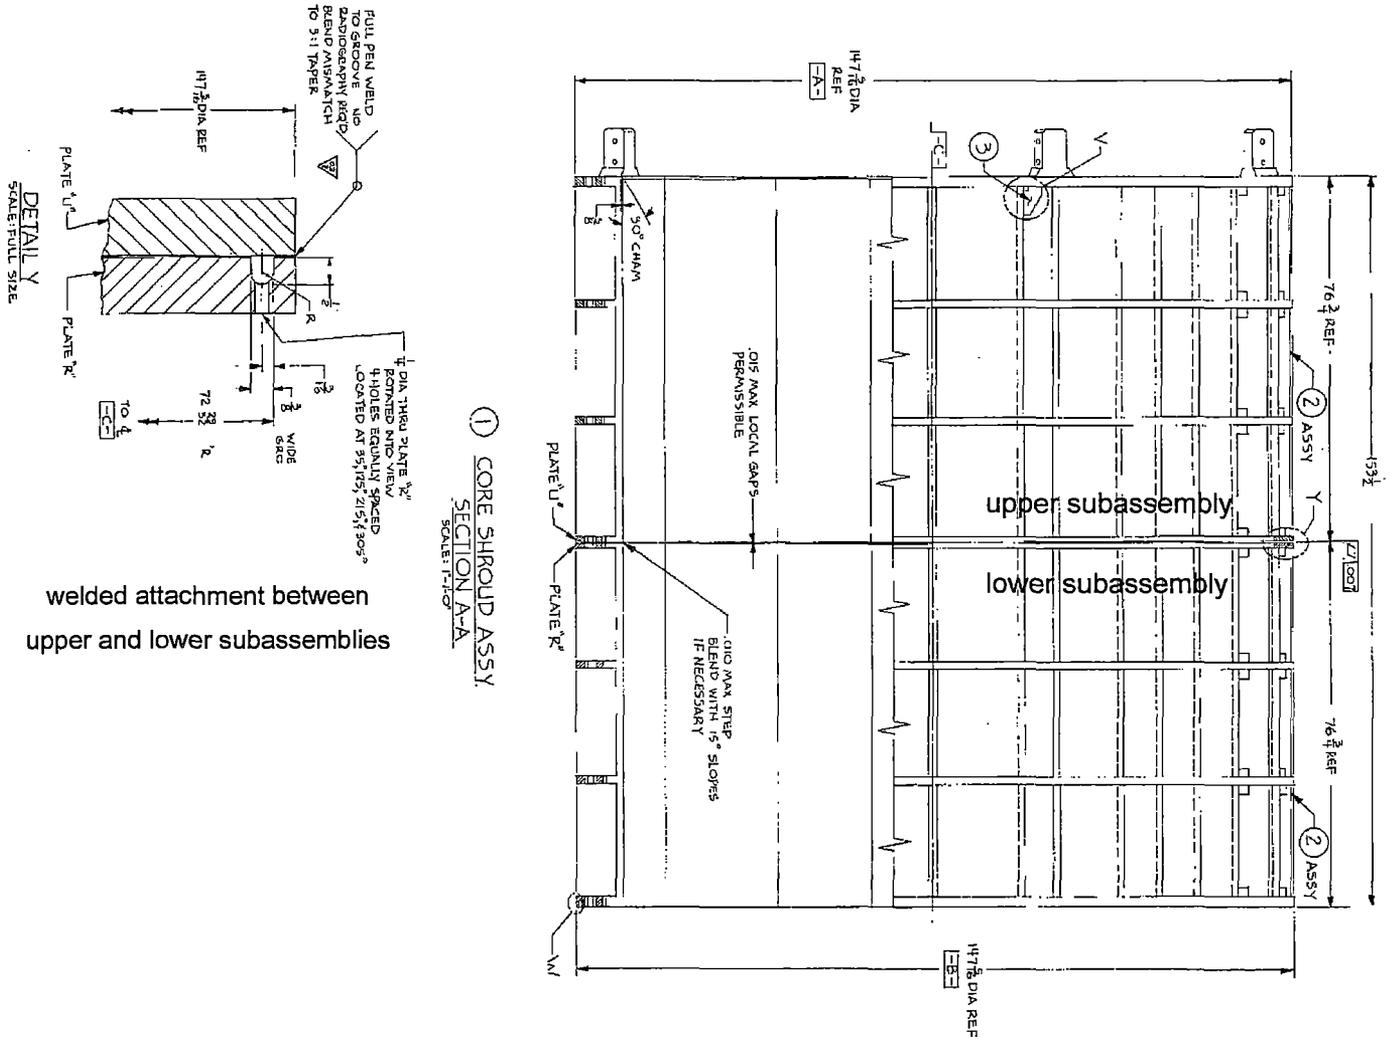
SL1 Core Shroud Assembly – Plan View
